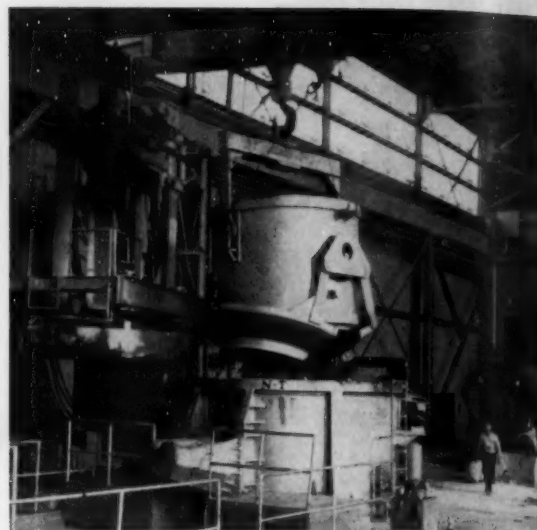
An auxiliary crane hook is used to pull the cable, once the charger is located over the furnace, which opens the clam shell bottom.
